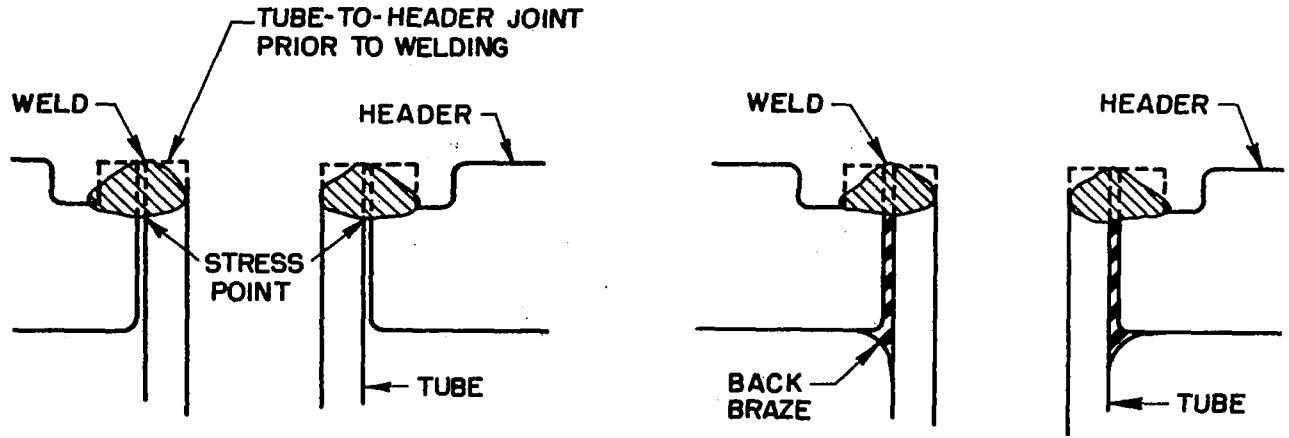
Condenser Tube-to-Header Weld and Back Braze Joint
